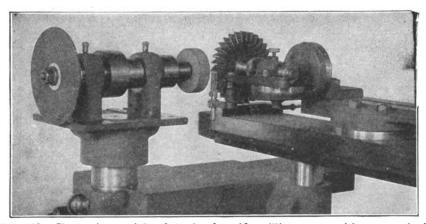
Sharpening peripheral teeth of a side milling cutter with a cup wheel.
